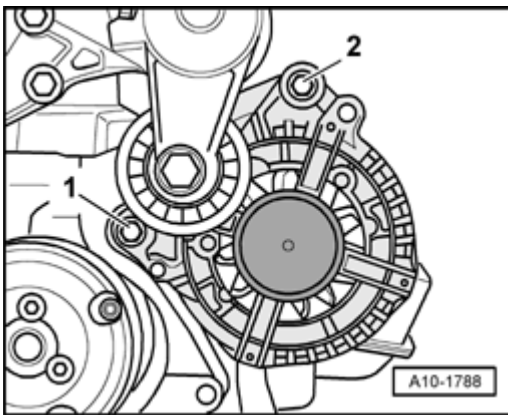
Removing Upper/Lower Securing Bolt For Generator
